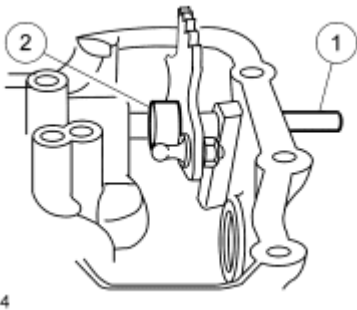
Manual Valve Detent Lever & Shaft Assembly
